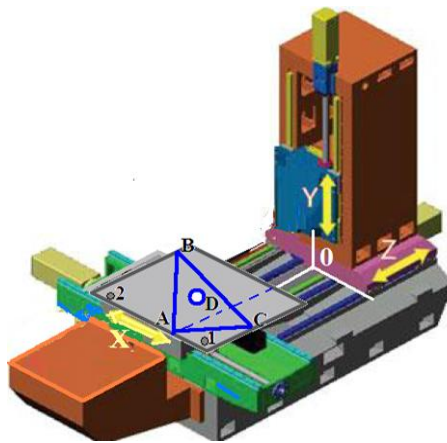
Cutting path A-> B B-> C C-> A (triangle). Tool approach to point D for drilling. Anchoring points are designated blanks 1, 2.
